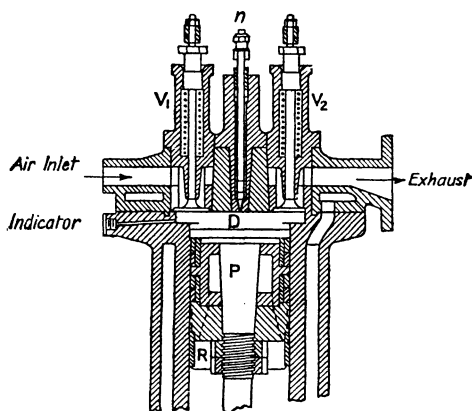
Diesel Oil Engine (Sectional Elevation)
